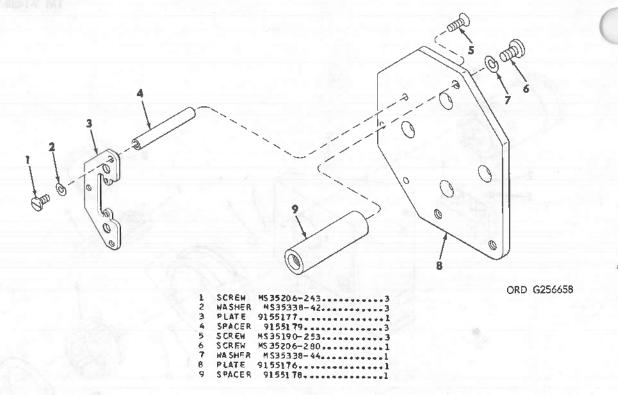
MOUNT, DRIVE TUNING /MAGNETRON/ /9155168/-EXPLODED VIEW /SEE FIGURE 76 FOR NEXT HIGHER ASSEMBLY/
